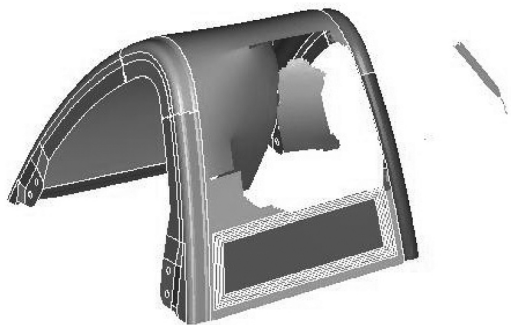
Exploded view of parts of the LS-DYNA 2004 model.
